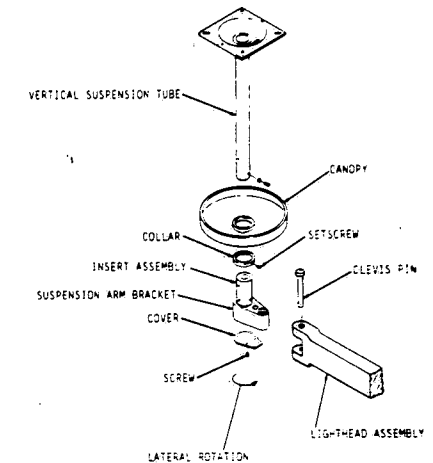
INSTALLING BRACKET AND INSERT KIT.
